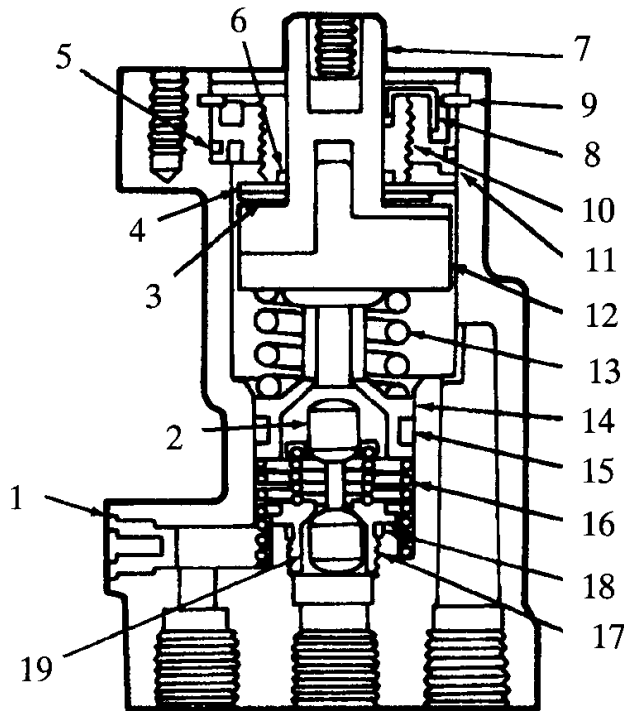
Midland-Ross Hand Control Valve - Disassembly
